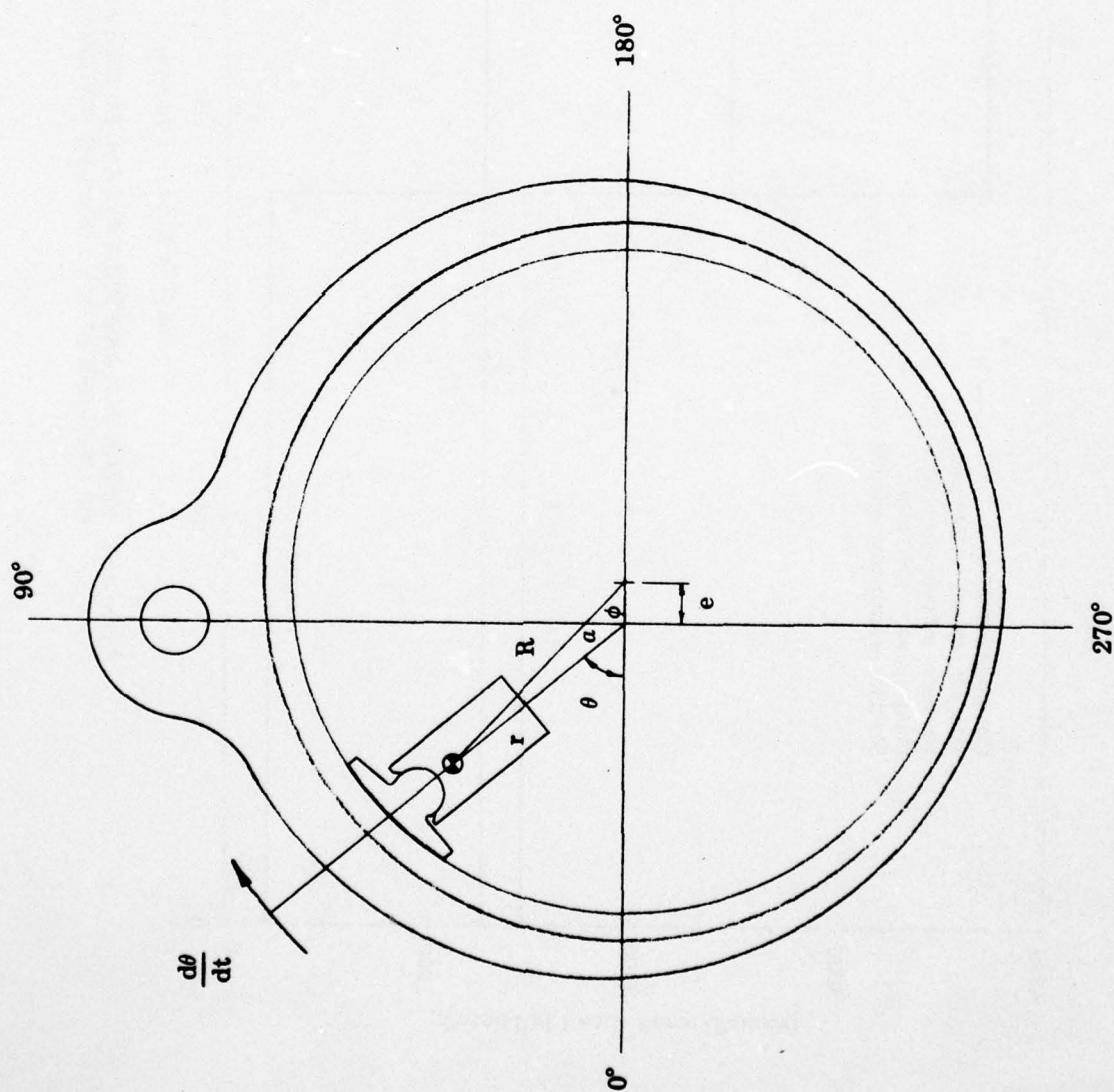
SINGLE PISTON-PAD ASSEMBLY
